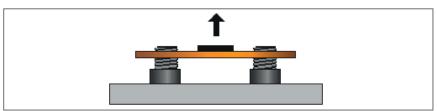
HV BM 1.2+S, power cable HV- (≤35 mm²), removing the shunt module from the threaded bolts
